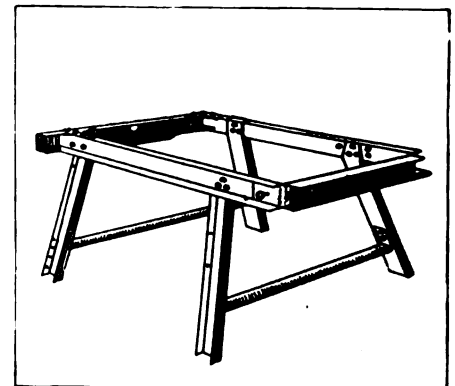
Showing Engine Stand That Was Made from a Discarded Car Frame.
